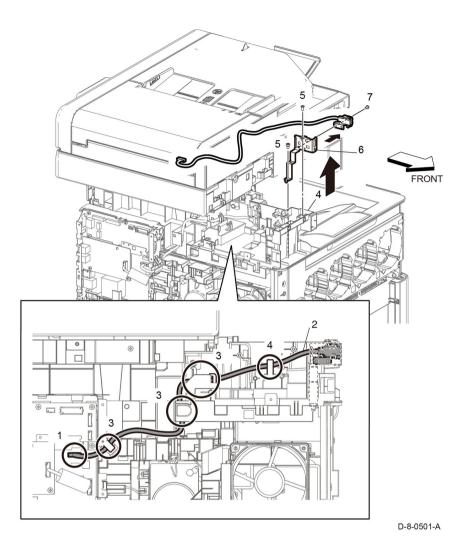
Remove the USB ICCR harness assembly (C505/C605/C605_Tall)
